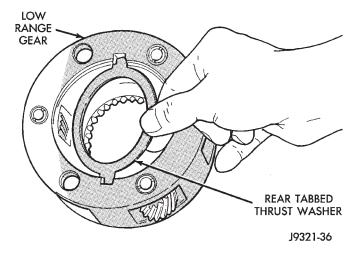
Rear Tabbed Thrust Washer Removal INPUT AND LOW RANGE GEAR ASSEMBLE
